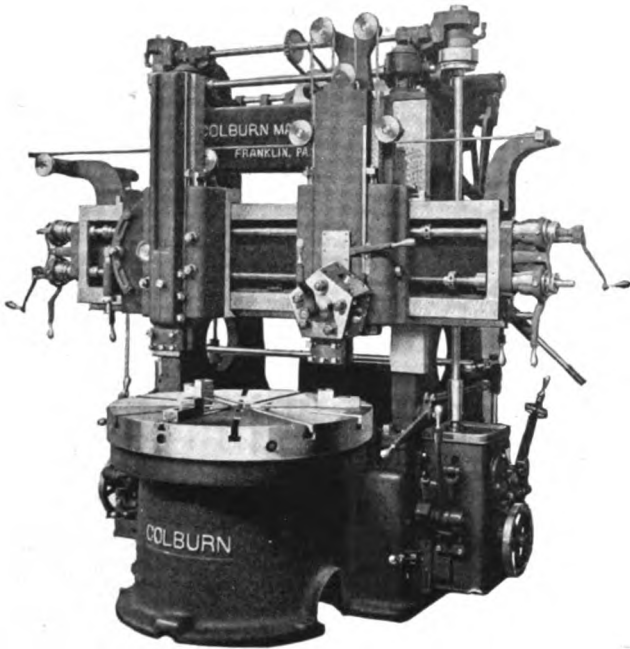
48-Inch Vertical Boring and Turning Mill with One Swivel and One Turret Head and Three-Jaw Combination Chuck
